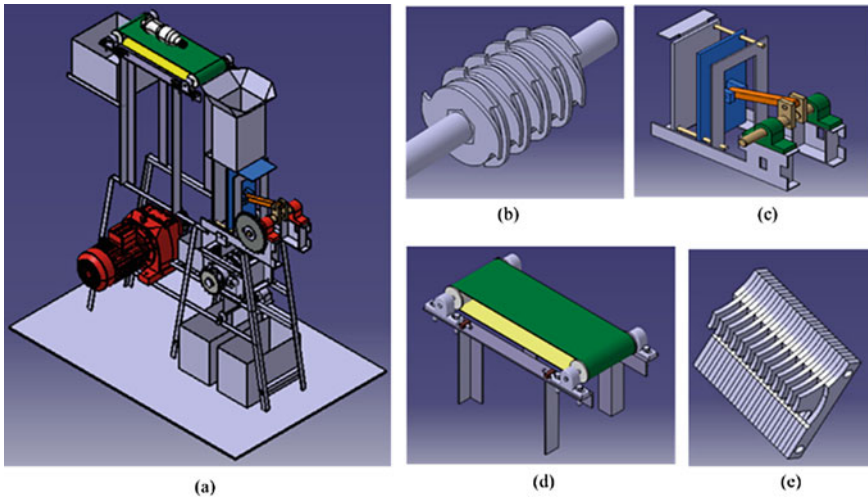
a CAD assembly of machine; b CAD model of rotary shredder assembly; c CAD model of crusher; d CAD model of bi-directional conveyor belt; e CAD model of fixed blades assembly
